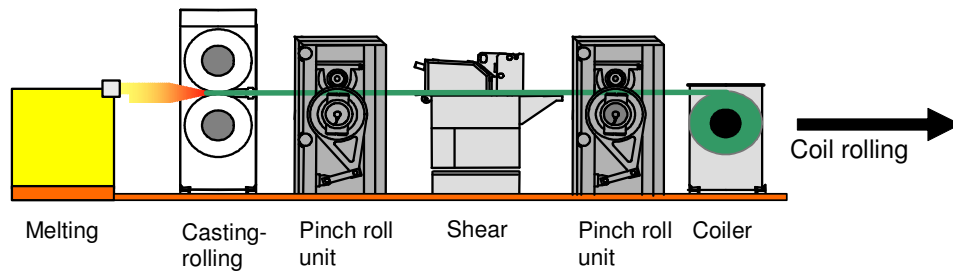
Principle of the casting-rolling pilot mill of the MgF Magnesium Flachprodukte GmbH
